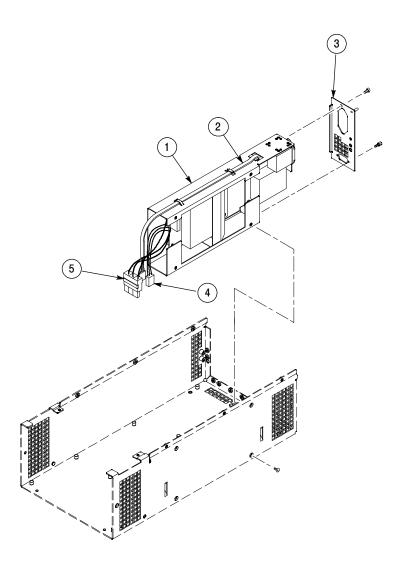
WFM700 power supply assembly and rear panel (B010999 and below)
